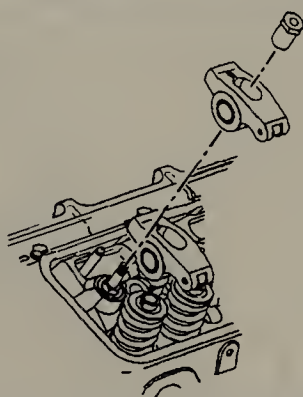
Exploded view of the rocker arm nut (1), ball (2), rocker arm (3) and stud (4)
